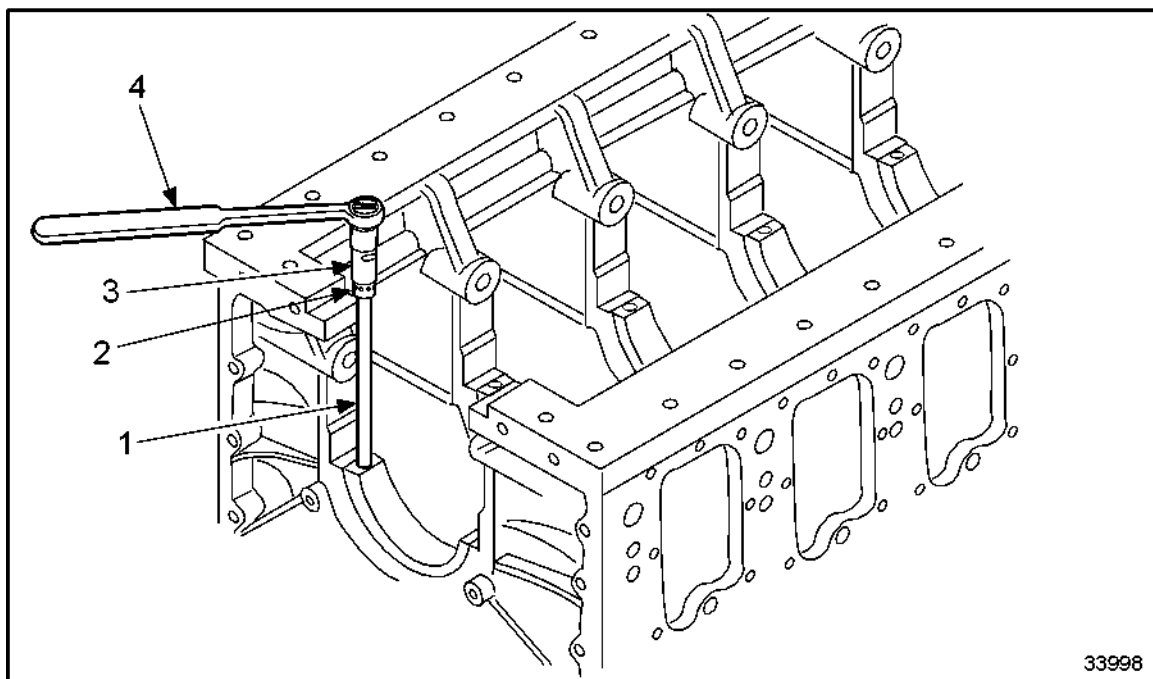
Installing Crankshaft Main Bearing Cap Studs
